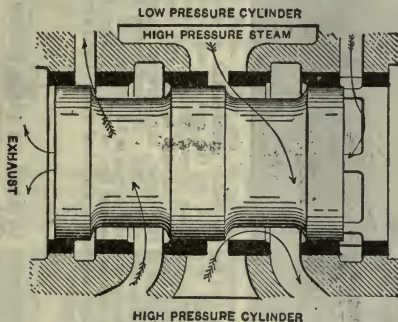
Piston valve for compound engine distributing the steam to both cylinders. The cranks being at 180° , one valve suffices for both cylinders. The arrows indicate the path of the steam.
